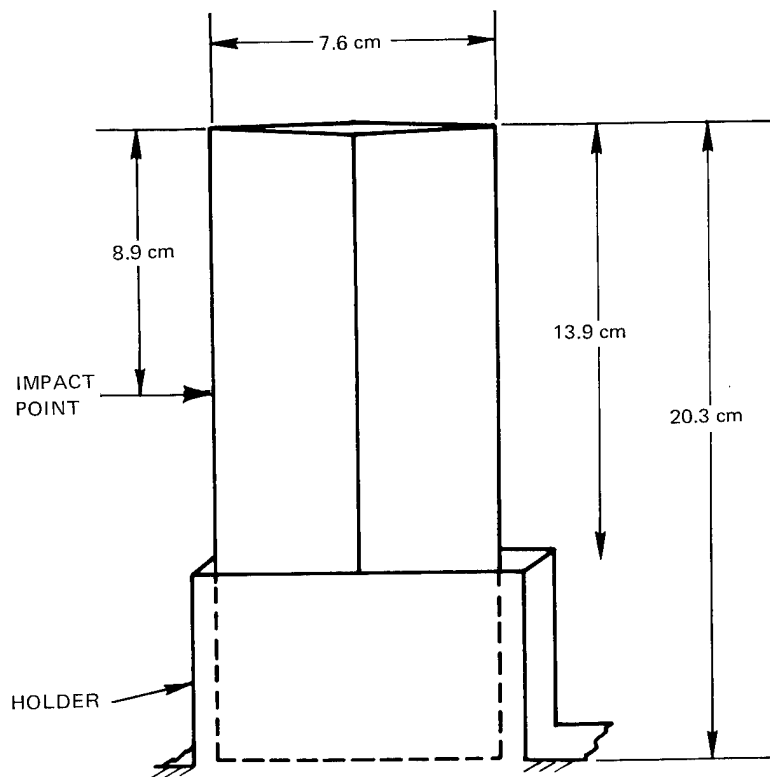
Schematic of Fixture for Torsional Load Testing of Blades
